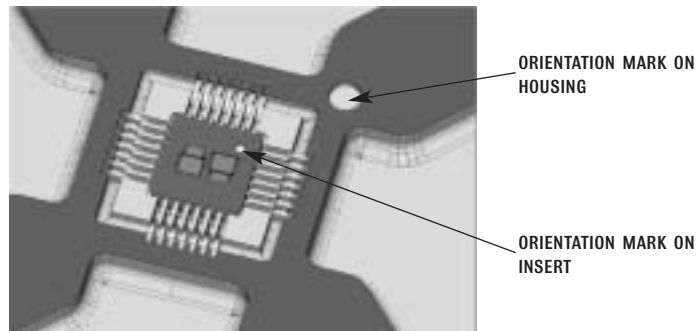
VIEW FROM OF LOAD BOARD SIDE OF CONTACTOR.
